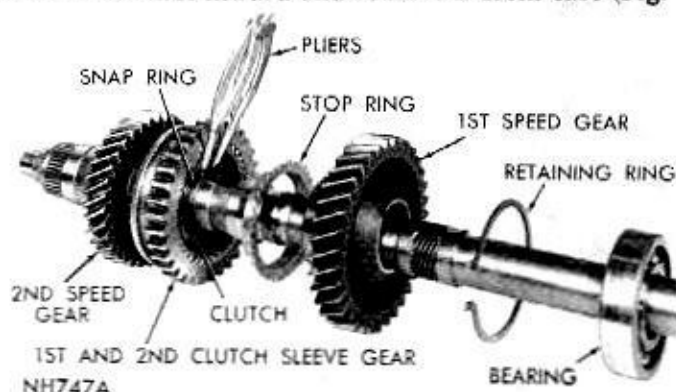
Removing or Installing Clutch Gear Snap Ring
